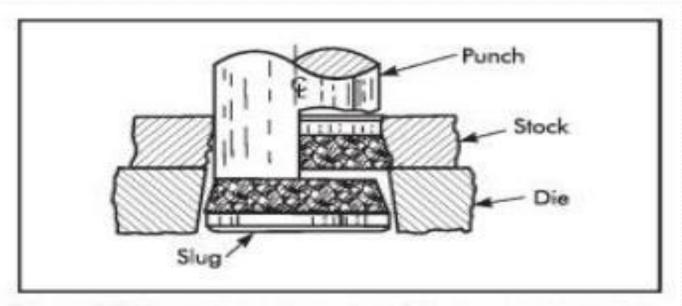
Section view of a successful hole-cutting operation involving normal clearances. Note that both the cut edge and slug have one third of metal thickness as a sheared edge shear and two thirds fracture (Smith 1994).
